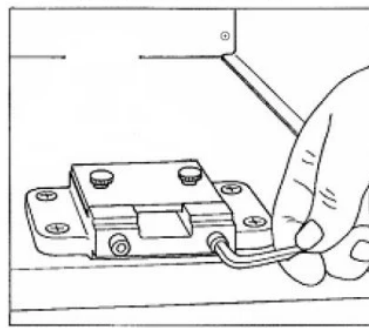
Removing Headrest Mounting Plate Hex Screws
